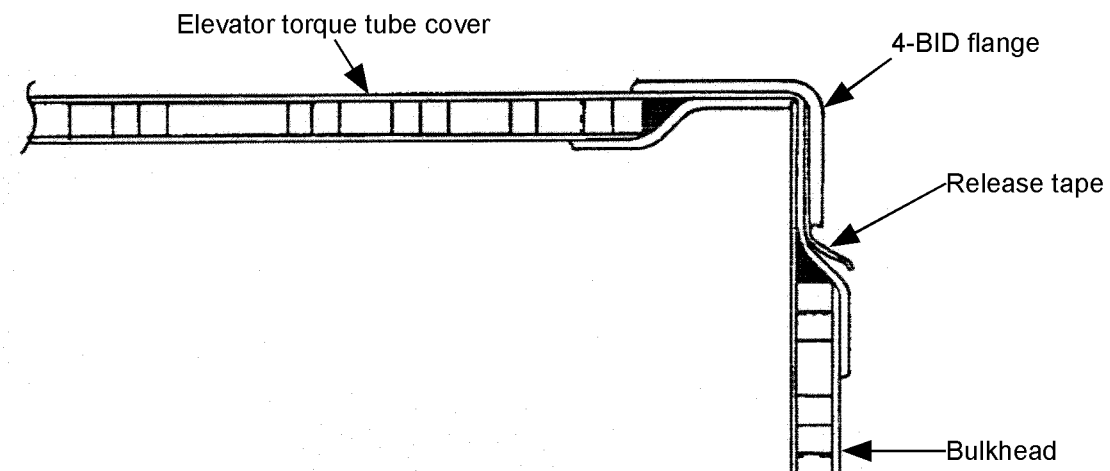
I.3 4-BID flange for fitting torque tube cover over the bulkhead
